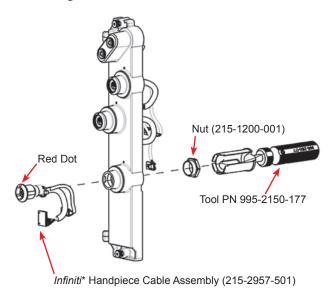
Infiniti* Handpiece Cable Assembly Removal
